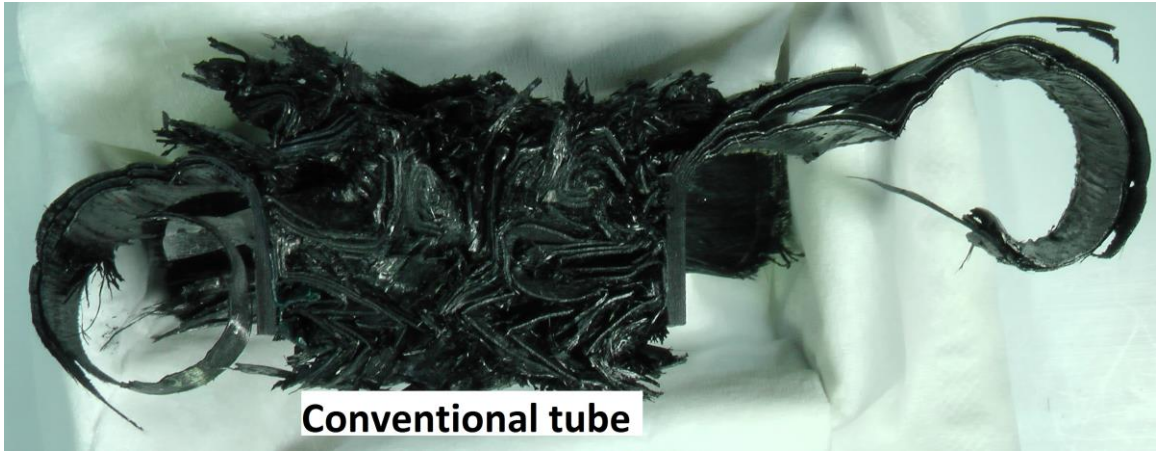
Cross-sectional view of final crushed specimen tubes.
